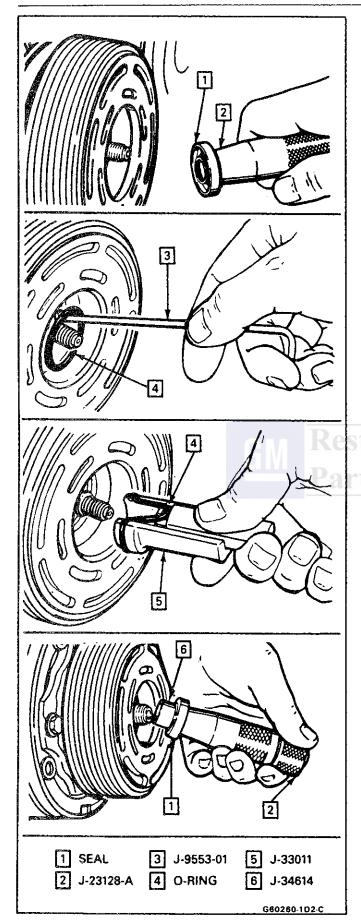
Removing and Installing Shaft Seal and O-Ring
